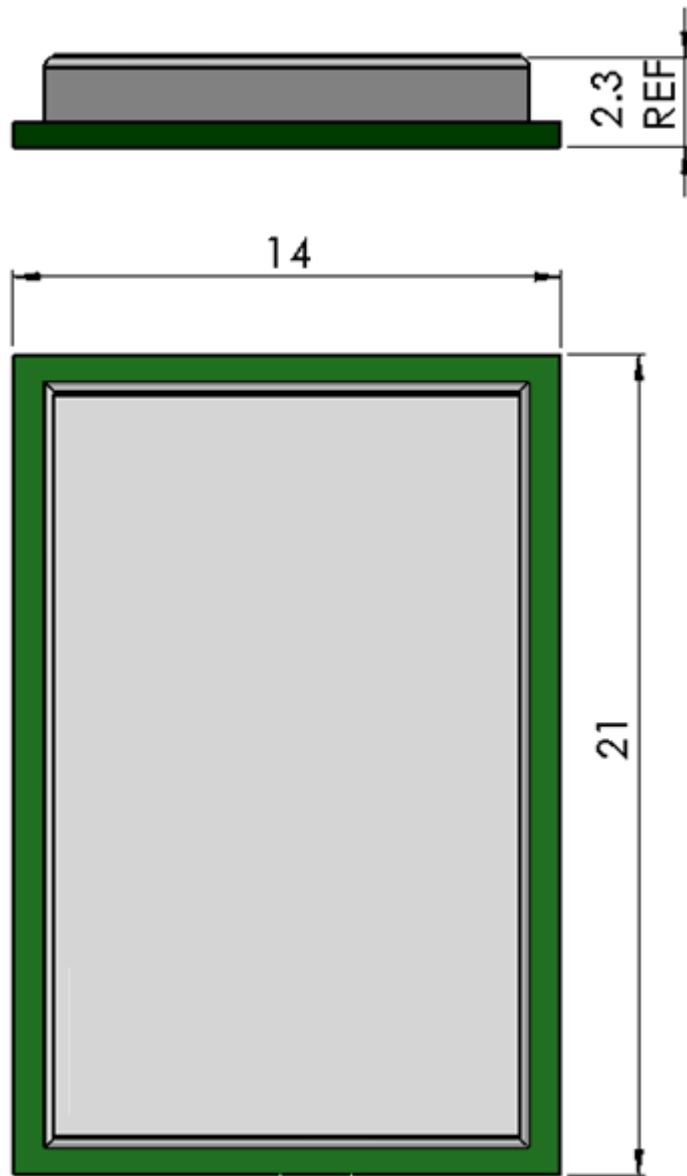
Module Mechanical Dimensions (Maximum Module Height = 2.4 mm)
